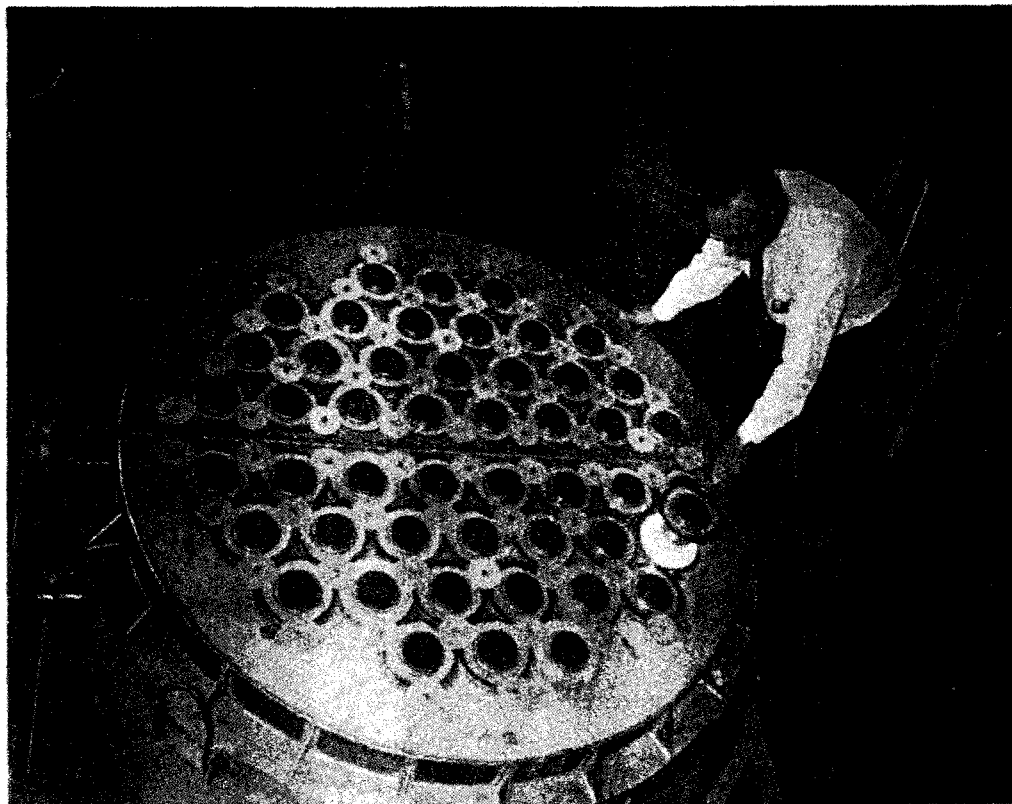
Second-Stage Multicyclone Separator-Tube Assembly
